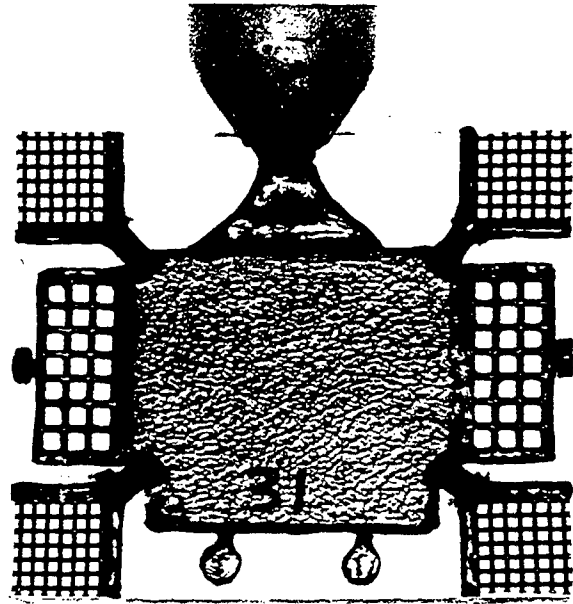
Wedge with Flared Attachment and Casting Aids Design
